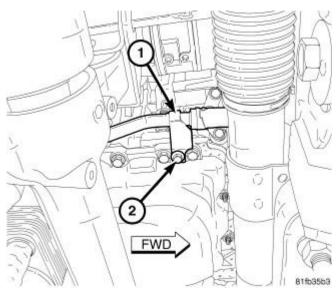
Oil Cooler Line & Bolt Courtesy of CHRYSLER LLC
